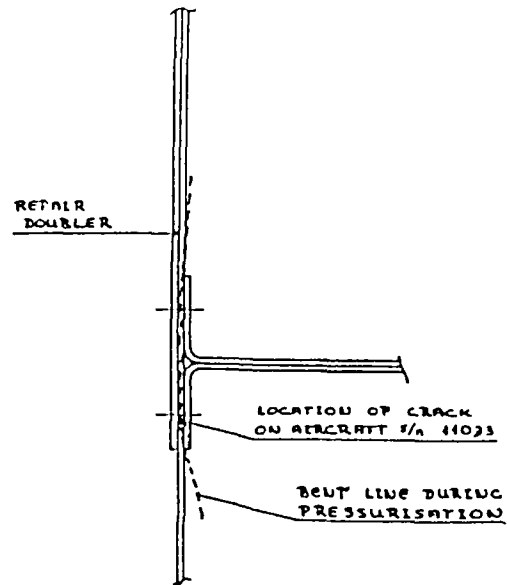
CROSS SECTION OF DOUBLER INSTALLATION ON F28 BULKHEAD
